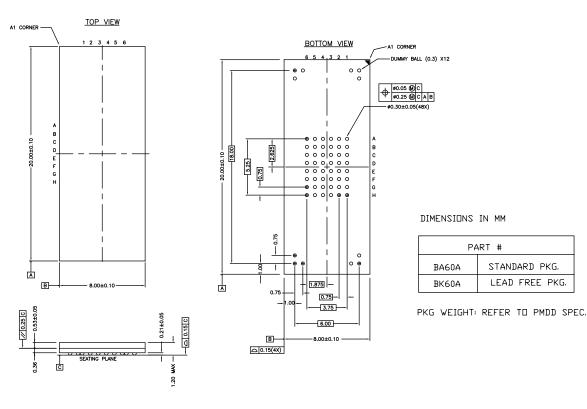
60-ball FBGA (8 × 20 × 1.2 mm) Package Outline, 51-85162
